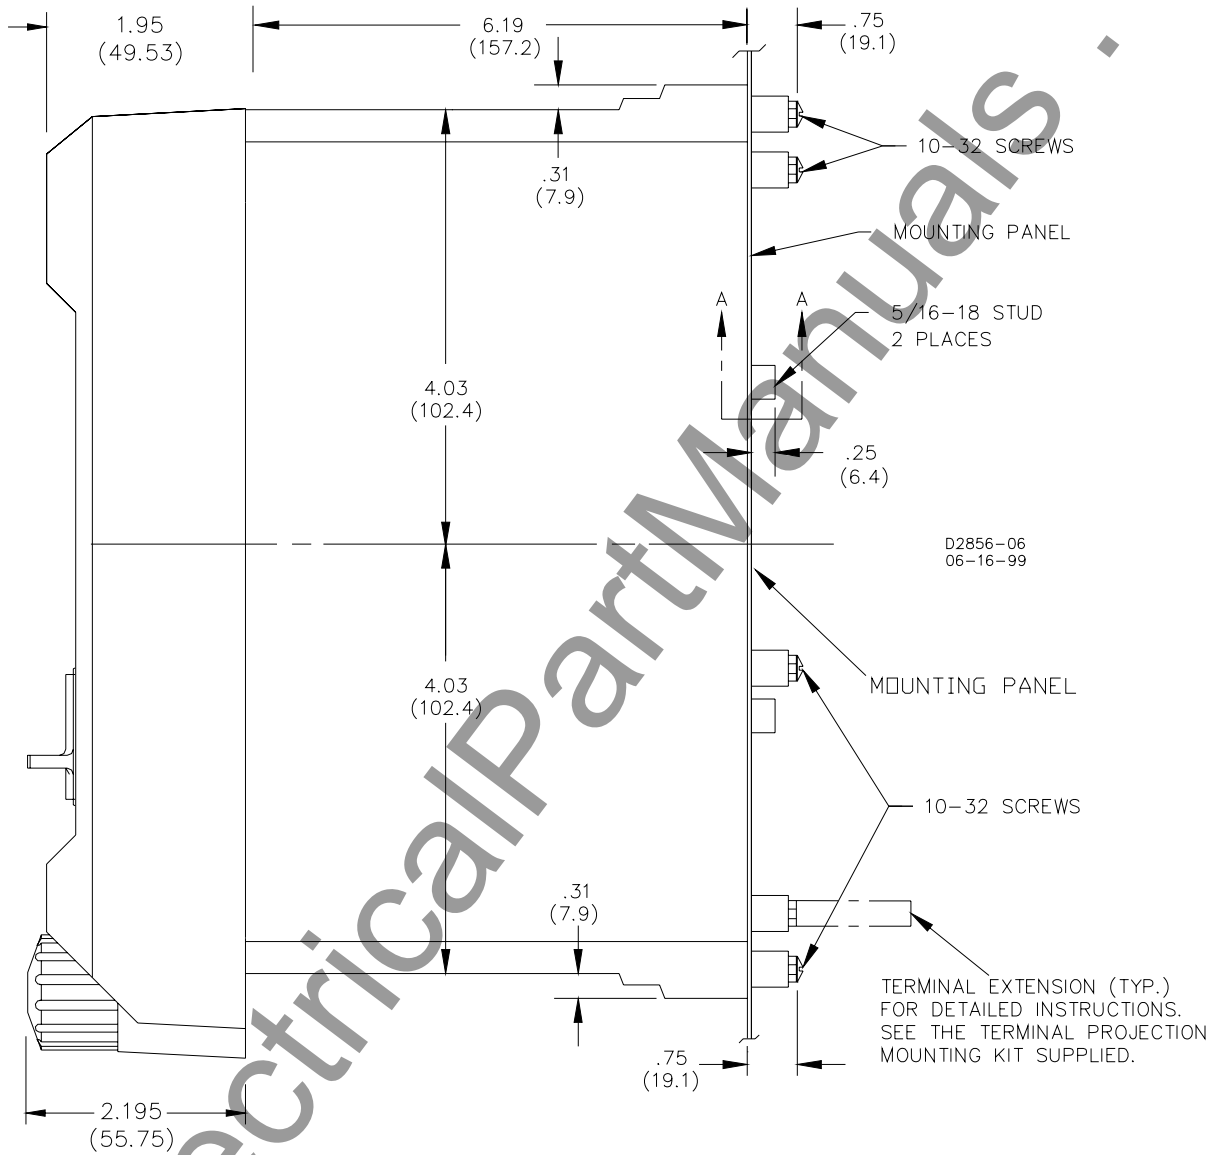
S1 Case Dimensions, Projection Mounting, Side View
